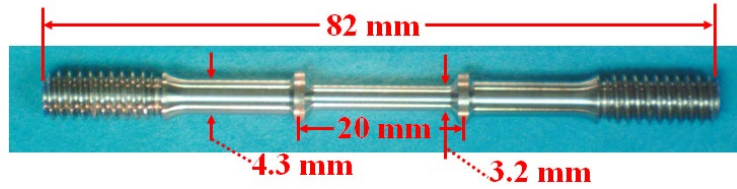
Tensile creep specimen showing gage dimensions and general design.
